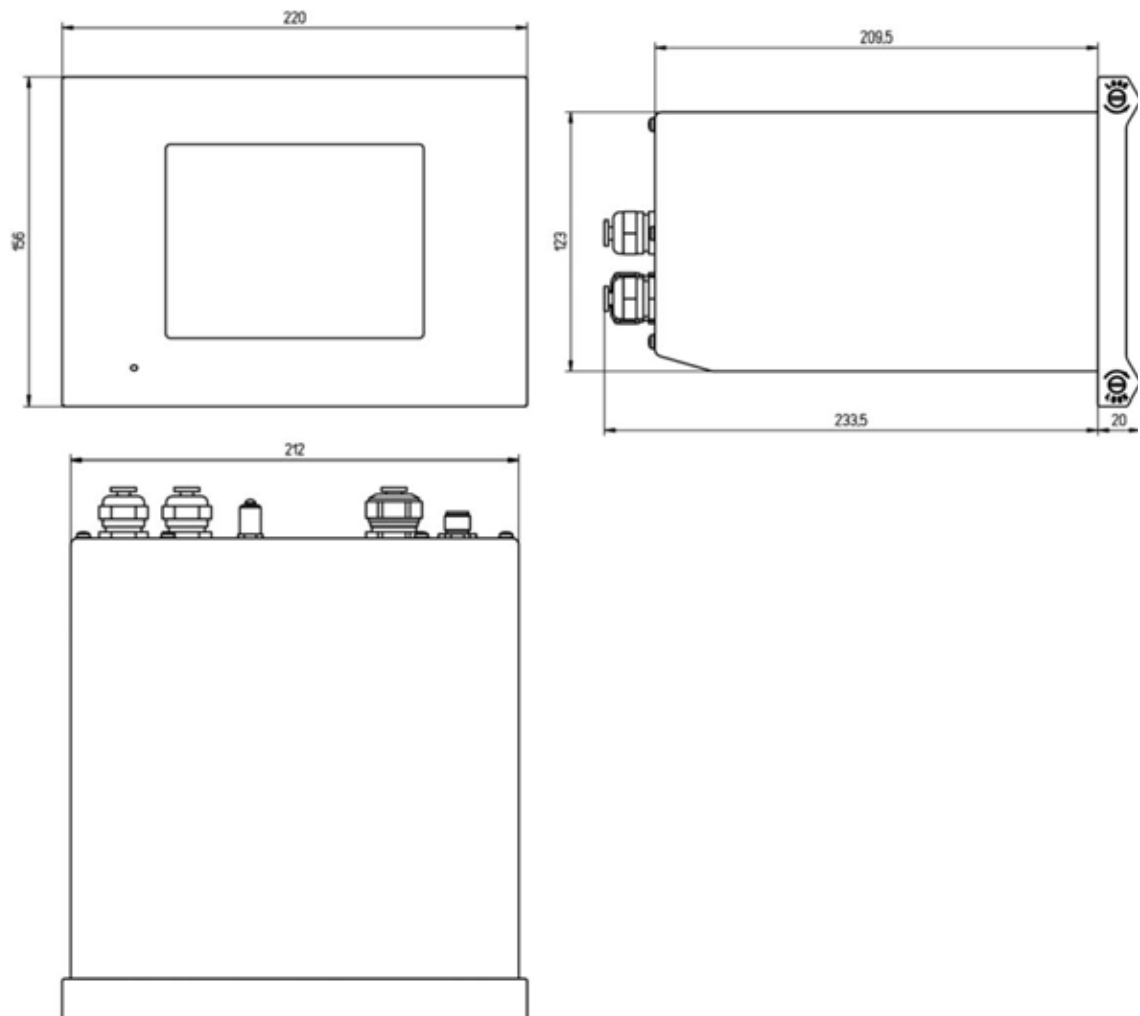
Panel Mount Instrument Dimensions (in millimeters)
